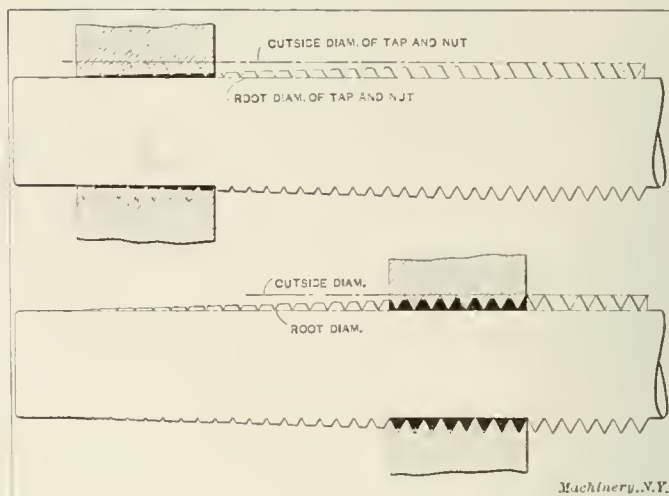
Tap Chamfered on Top of Thread, having no Taper at Root of Thread
